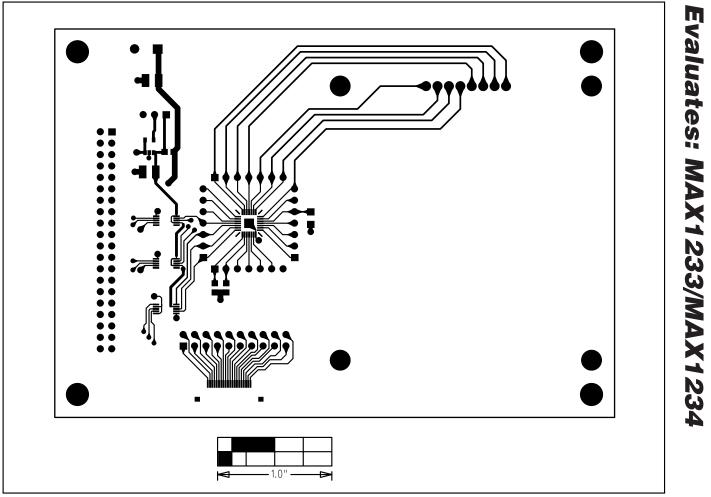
MAX1234 EV Kit PC Board Layout—Component Side
